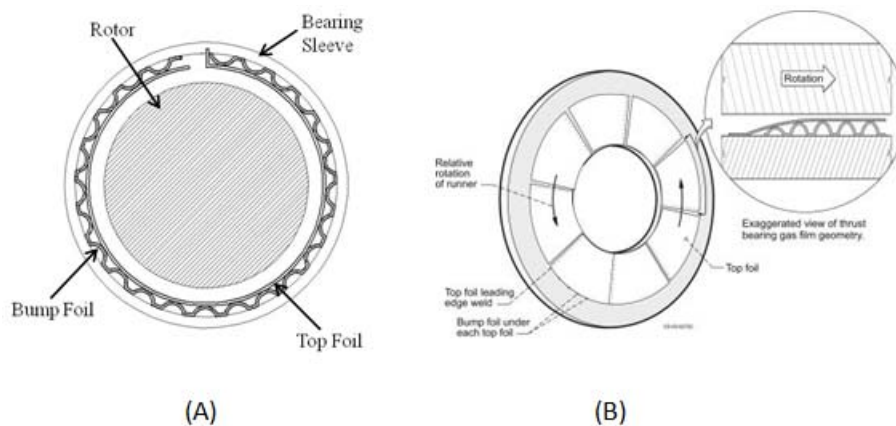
Various Form of Air Foil Bearing (A) Radial Type (B) Thrust Type [5]
